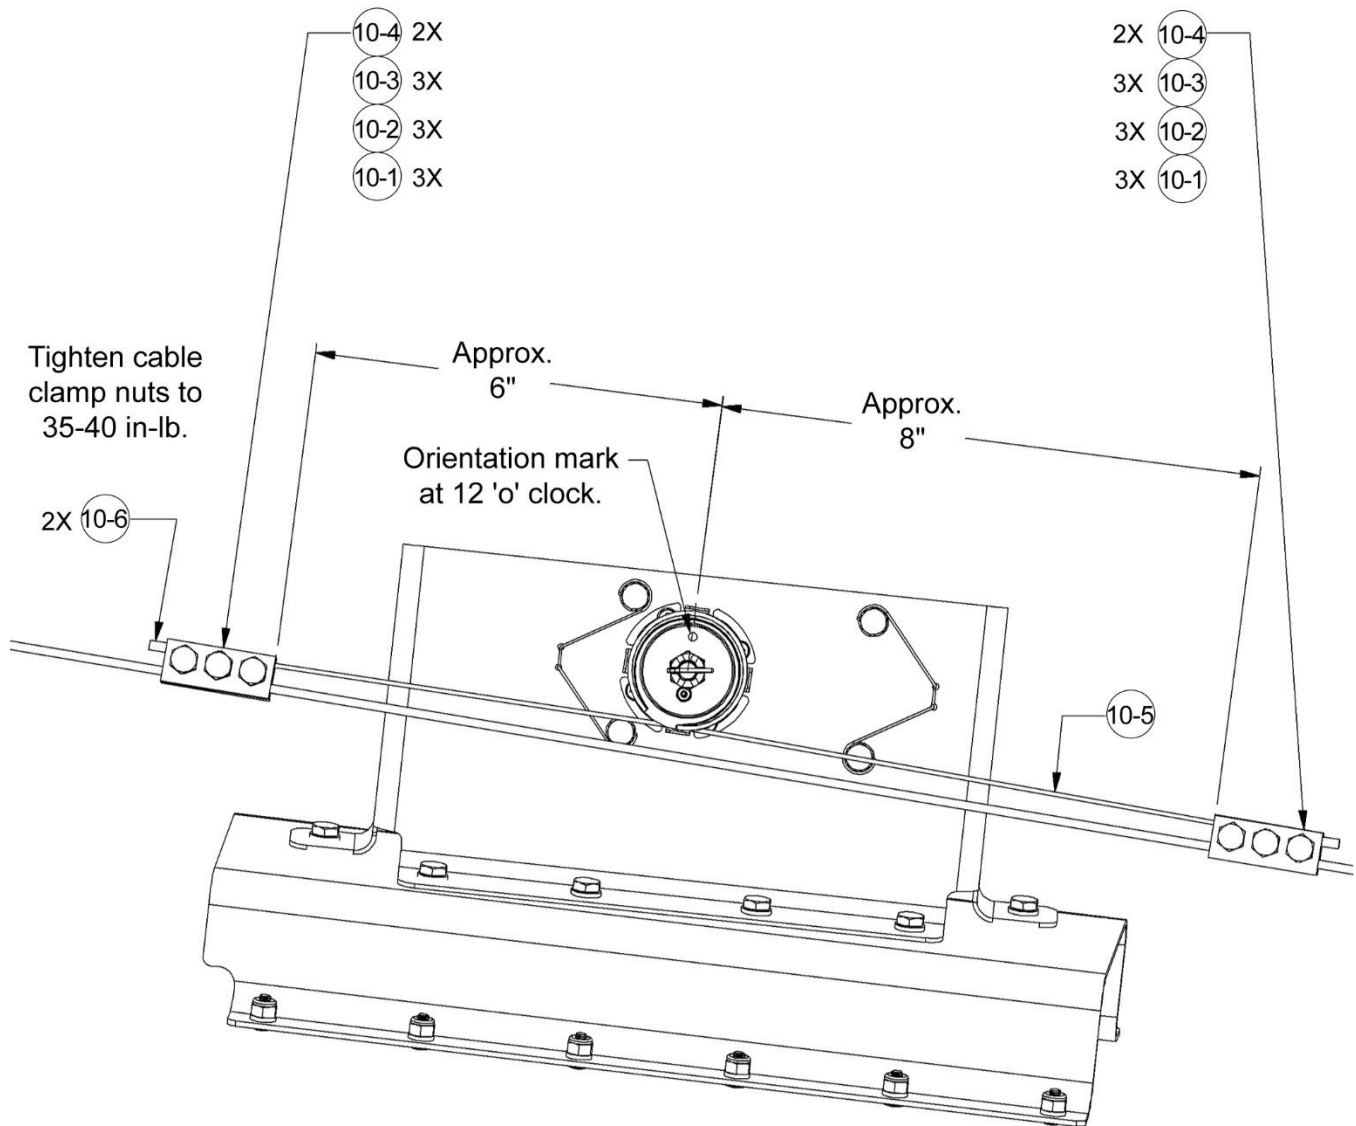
Attaching Bridle Cable to Elevator Control Cable
